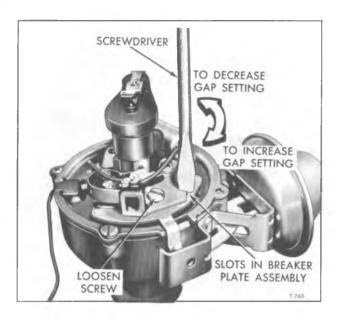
Setting Point Opening (In-Line and V6 Engines) (Typical)
